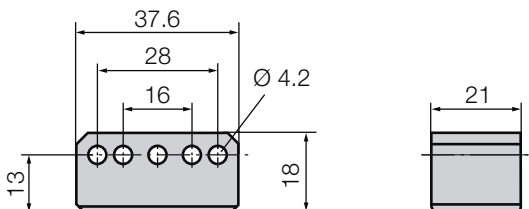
Installation dimensions of BTL6-A-3801-2 magnet
